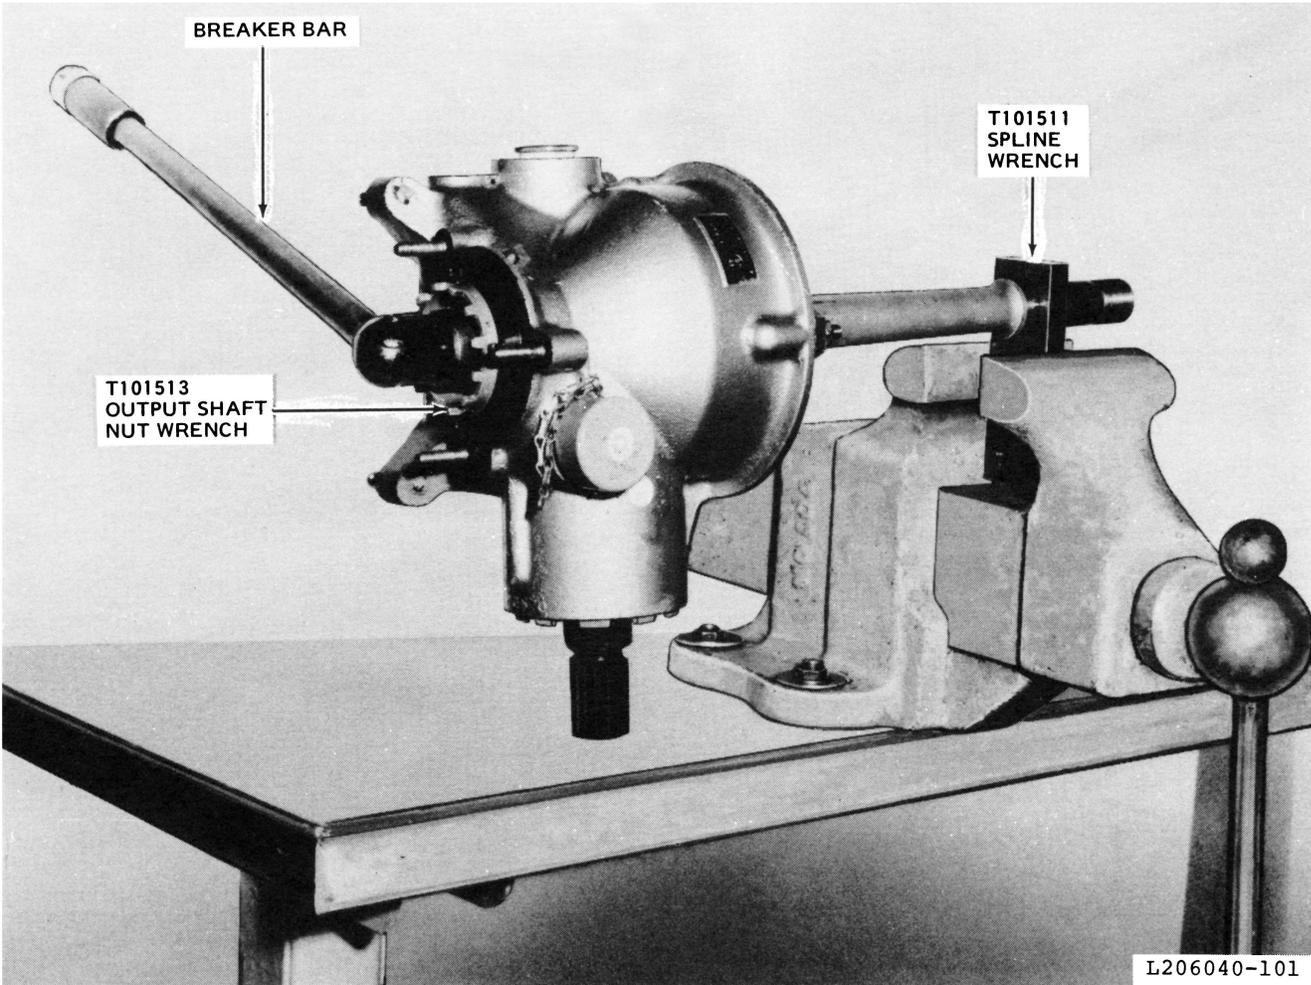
Output Shaft Inner Nut — Tool Application, T101151 and T101513
